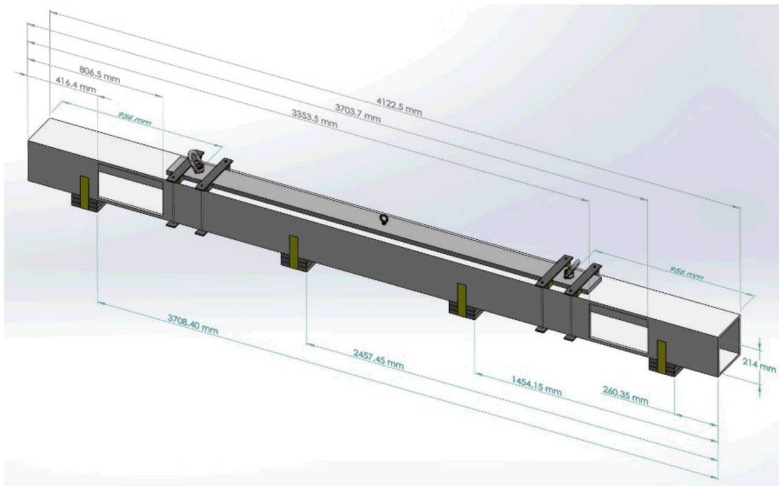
Full-scale 17x17 PWR assembly basket tube.
